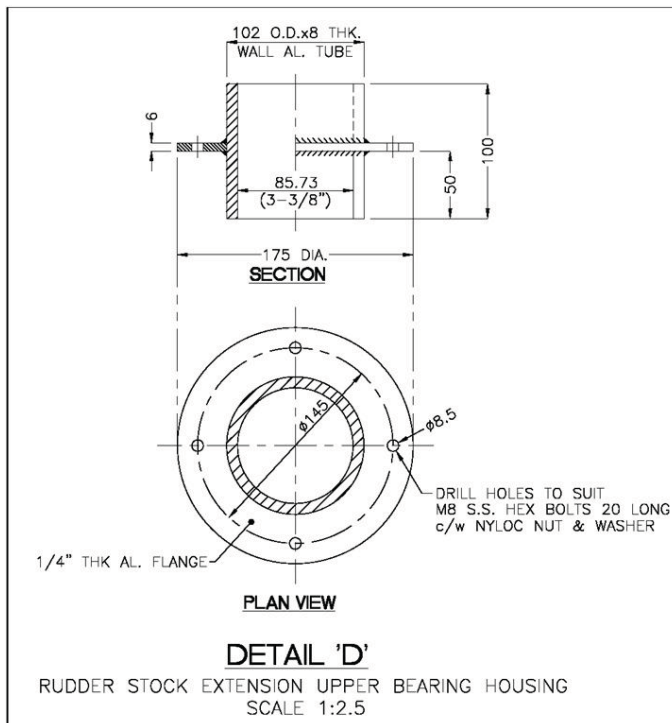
Rudder Drawing – Upper Bearing Detail
